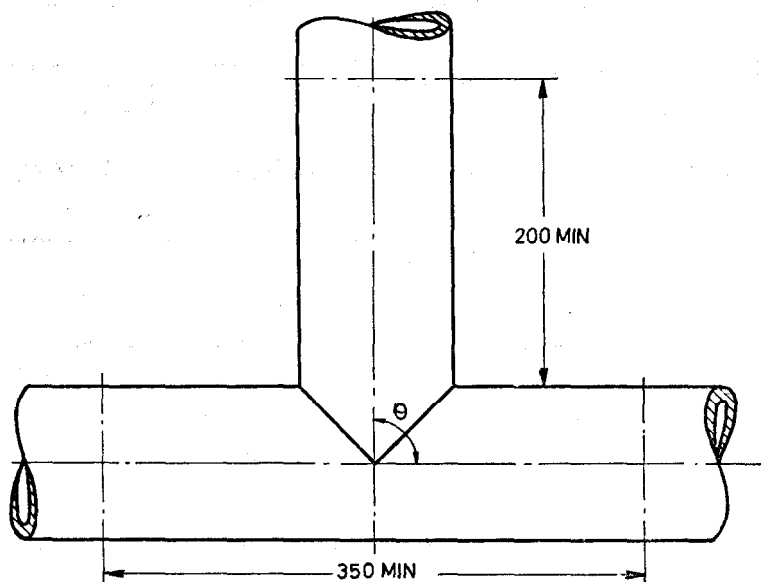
TEST PIECE AND LOCATION OF TEST SPECIMENS
